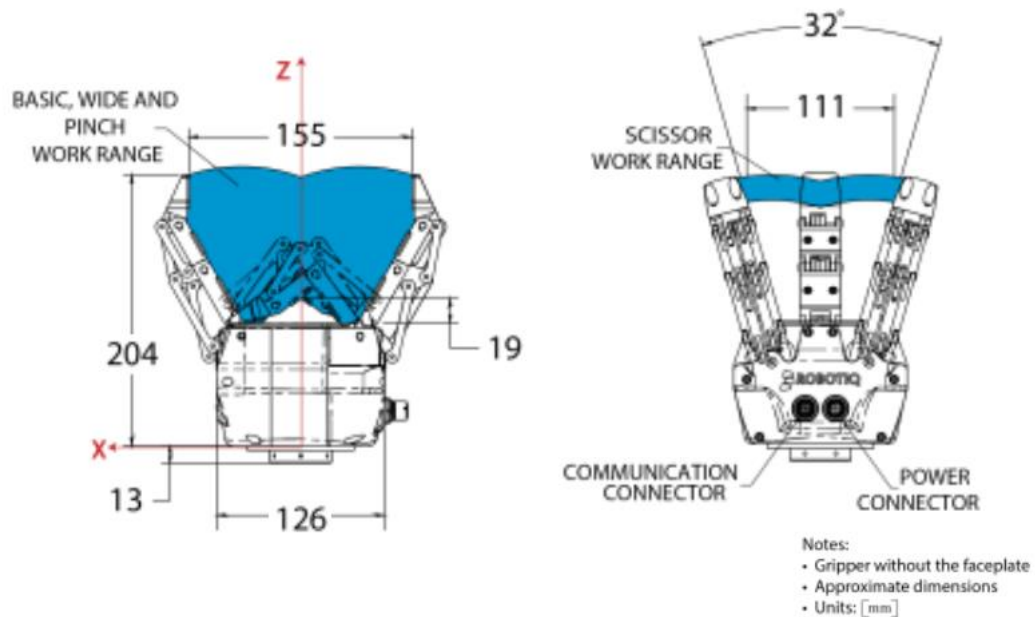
Technical dimensions (Robotiq Three-Finger Gripper Manual).
